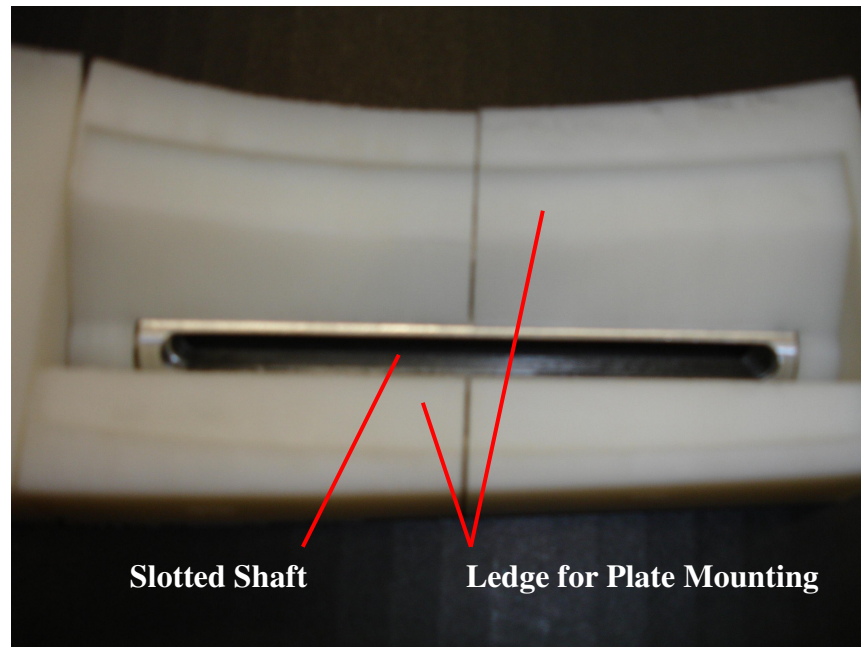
Slotted Shaft Valve Installed in a Blowing Plenum Chamber
